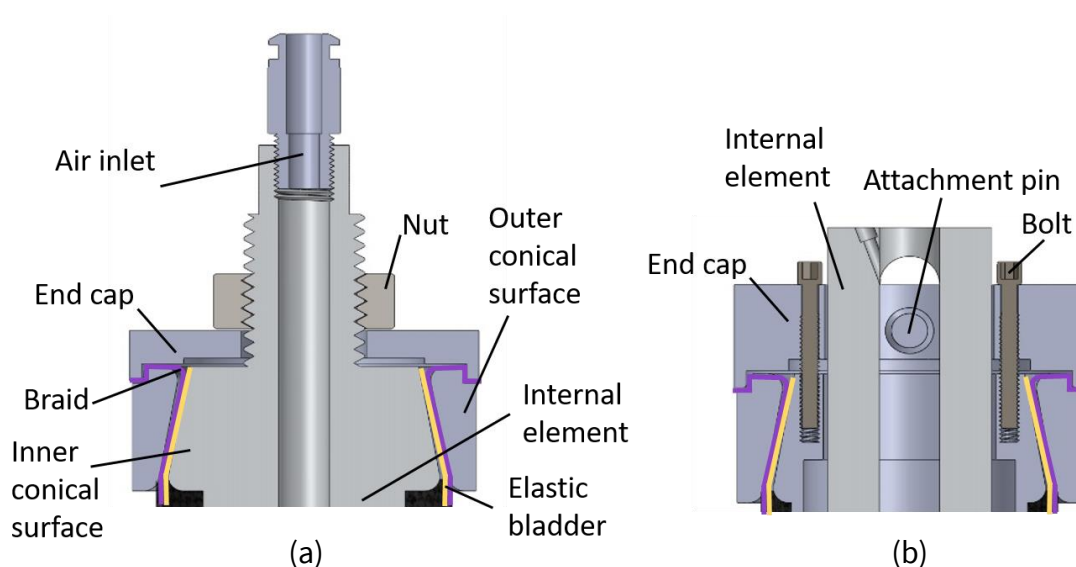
Cross section of the fixed end fitting (a), and the sliding end fitting (b).
